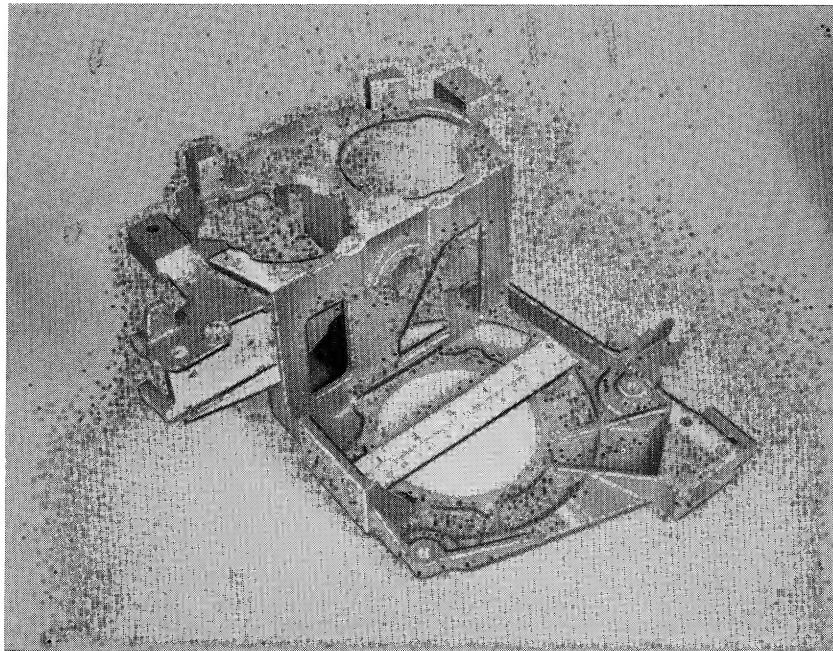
Complex antenna mount machined using two setups and two tapes. Sixty-one holes are centered and drilled, forty are counterbored, and thirty-two tapped. Nineteen surfaces are also milled. Machining time is eighty-one minutes.
